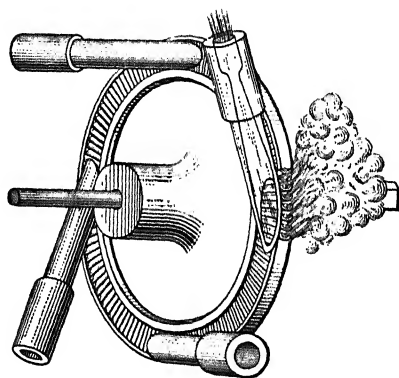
WHEEL AND NOZZLES OF DE LAVAL TURBINE.
